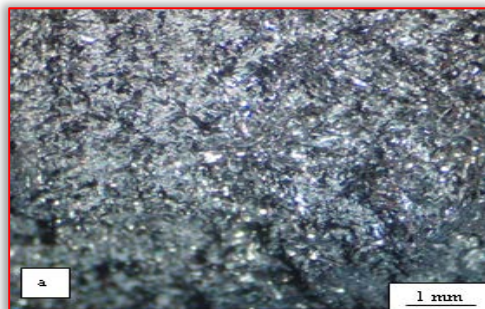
Fracture surface of cylinder head from the combustion chamber after tensile testing
